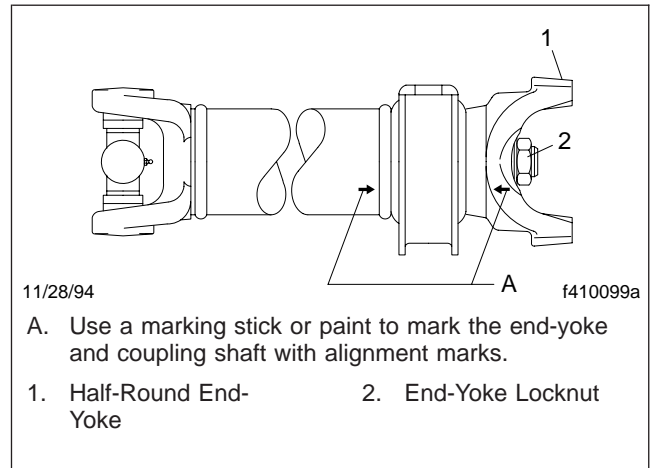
, Alignment Marks on a Coupling Shaft With an End-Yoke
